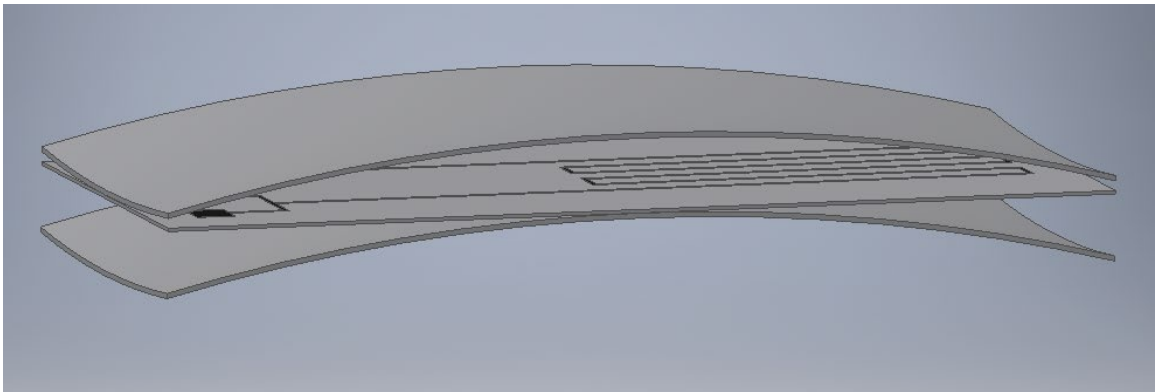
Sensor with 4 x 4 in. saddle-like fixtures
